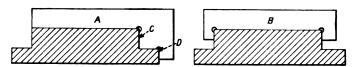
Gage for Measuring Packing Ring Space in Piston Valve Bull Rings
